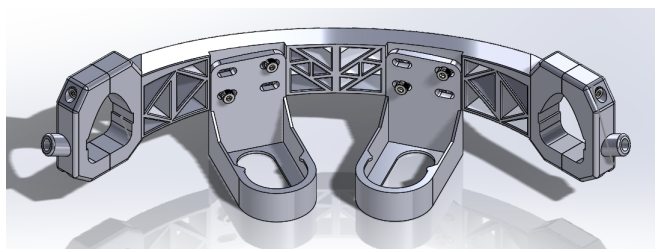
A CAD assembly of the Water Collection Subsystem.
